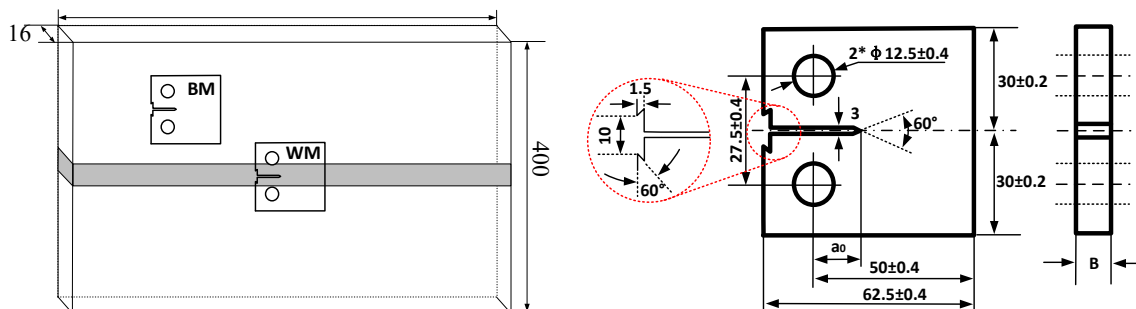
Fatigue crack growth sample illustration. (a) Schematic diagram of CT specimens from weld plate (mm); (b) Geometry of CT specimens (mm).
